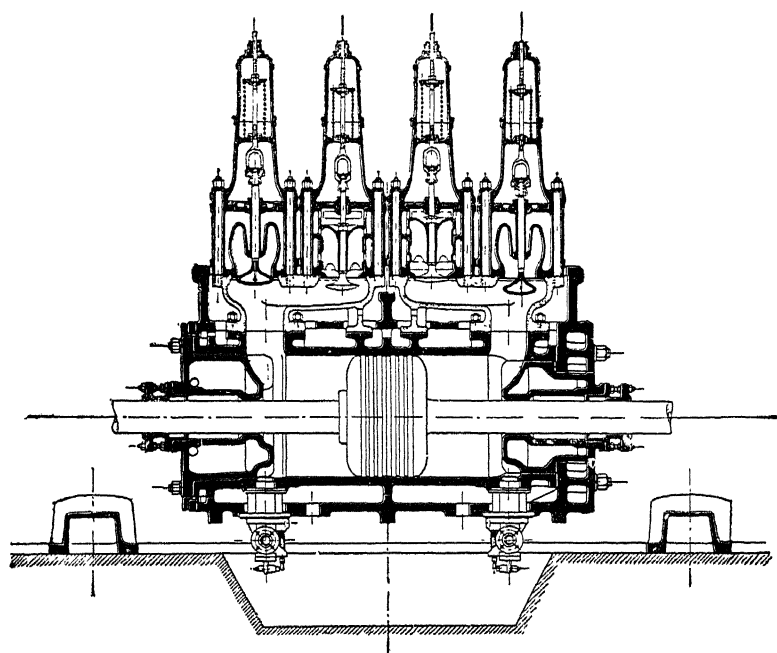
CYLINDER OF THE GAS-ENGINE OF FRIED. KRUPP AKTIEN GESELLSCHAFT, ESSEN A. D. RUHR.
